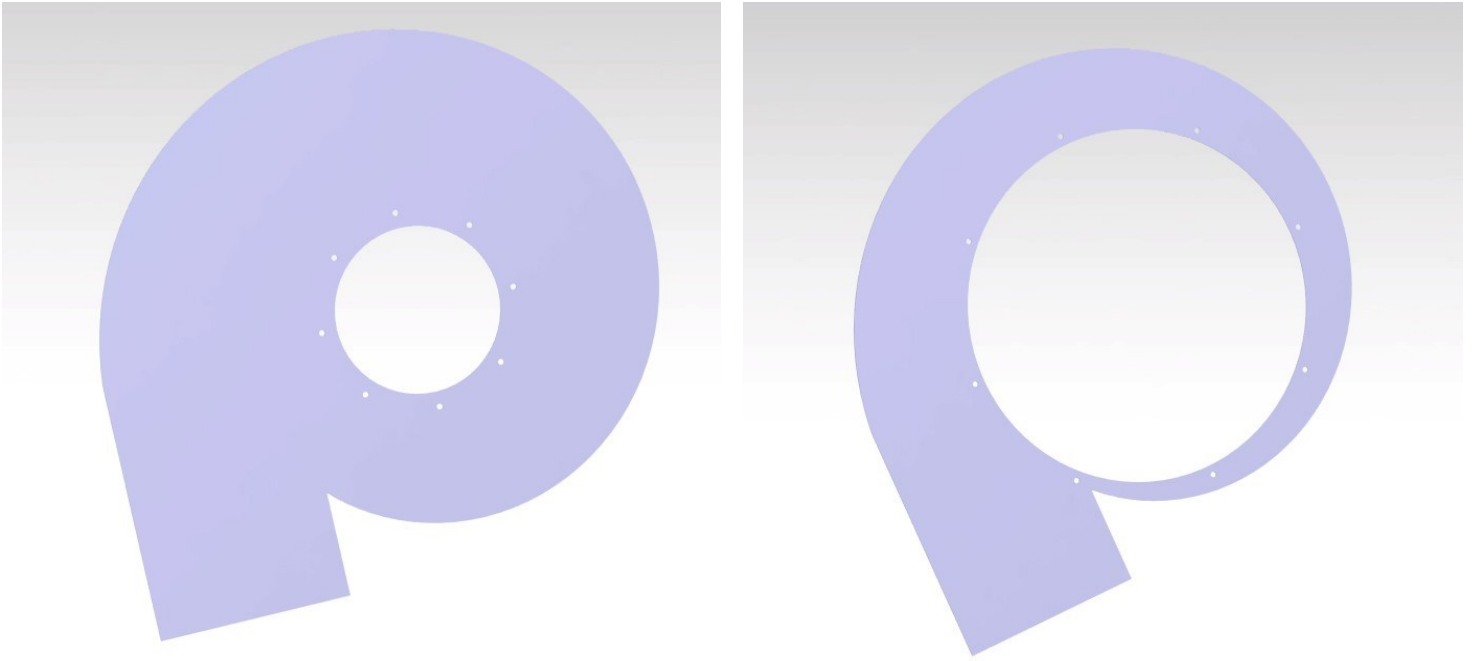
Casing's front plate with opening for the fan's inlet (left image). Casing's back plate with opening for the fan's assembly/disassembly (right image).
